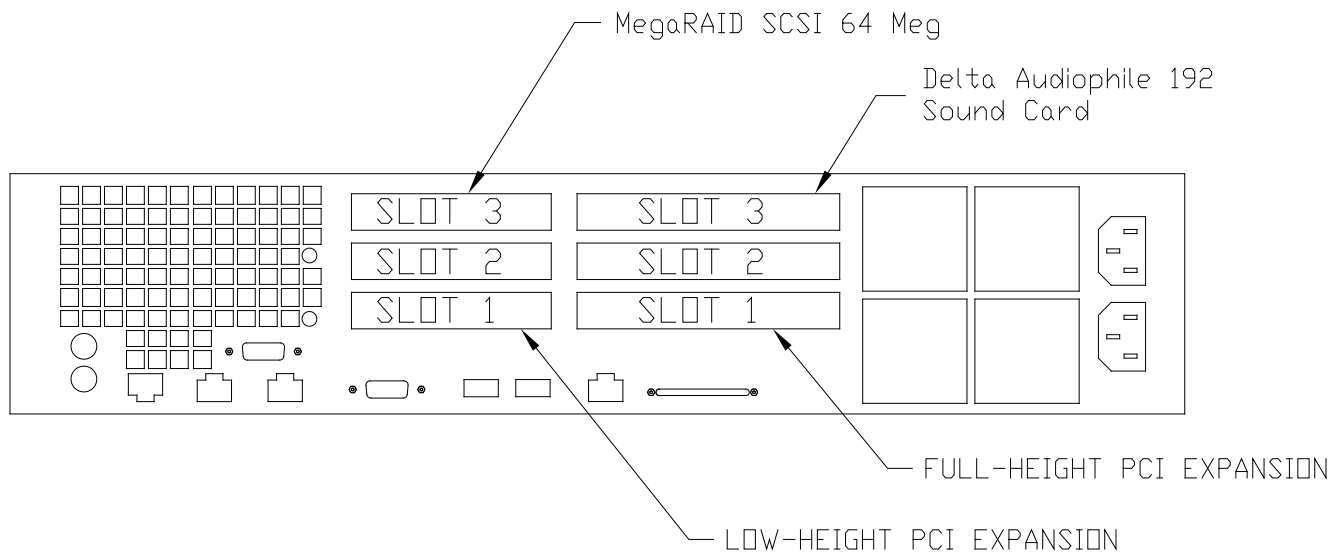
Host Computer PCI Bus Card Assembly Jumper Description
